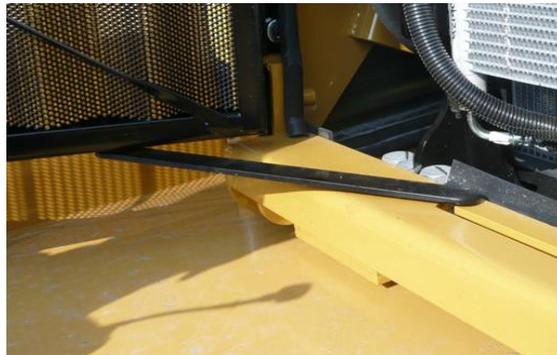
Slider Hold Open Mechanism on Loader Radiator Guard
